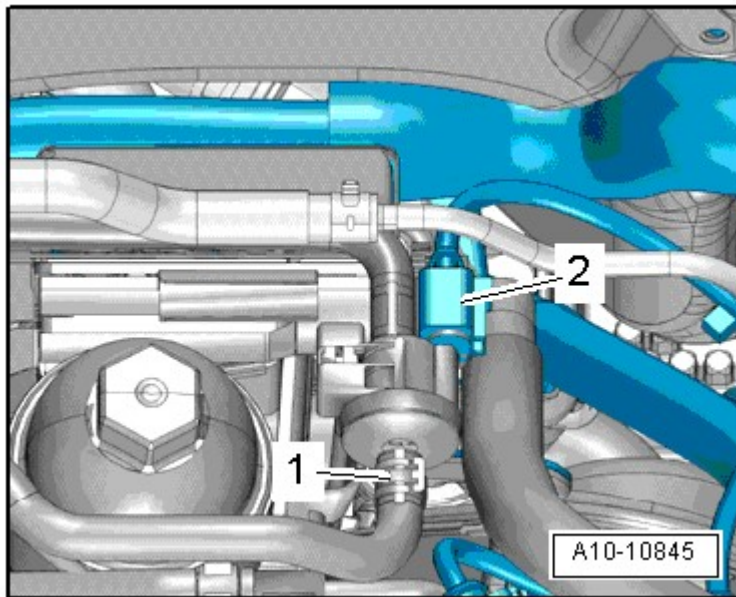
Disconnecting Electrical Connector -2- On EVAP Canister Purge Regulator Valve 1 -N80- & Disconnect Vacuum Hose -1-
